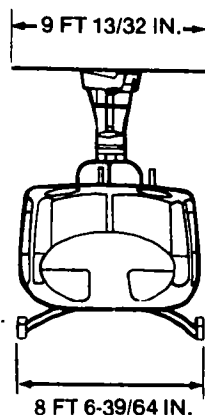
Principal Dimensions, UH-1V (Iroquois)
